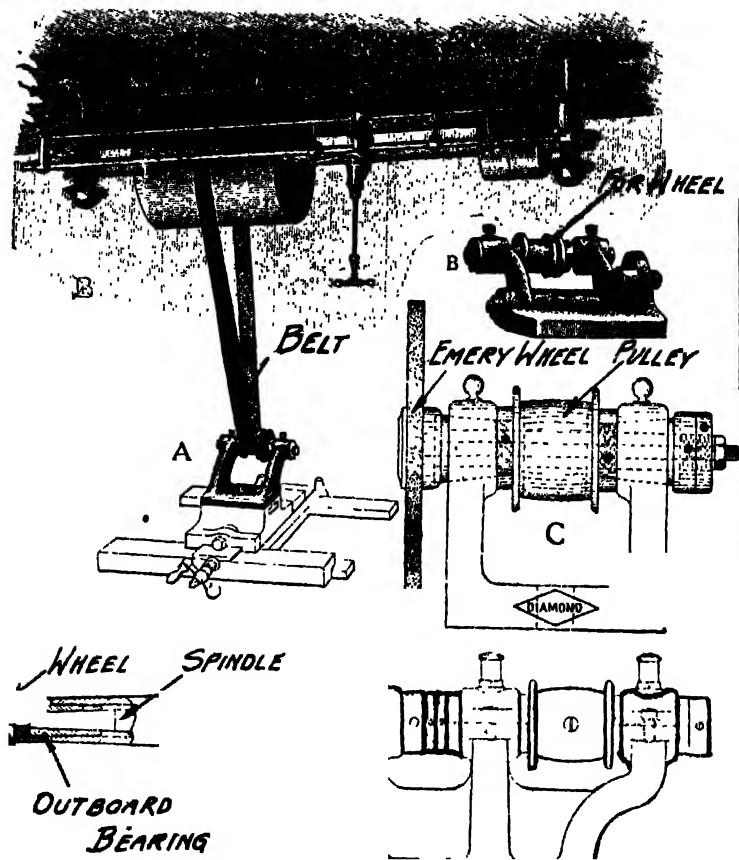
Grinding Attachments for Internal or External Work on Lathe.
